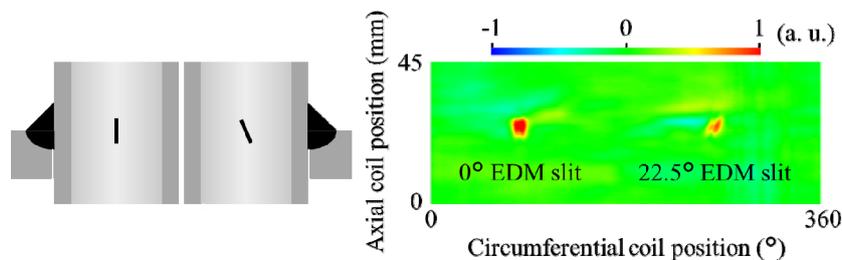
Result of defect detection test using welded specimen S1 and 0° coil
